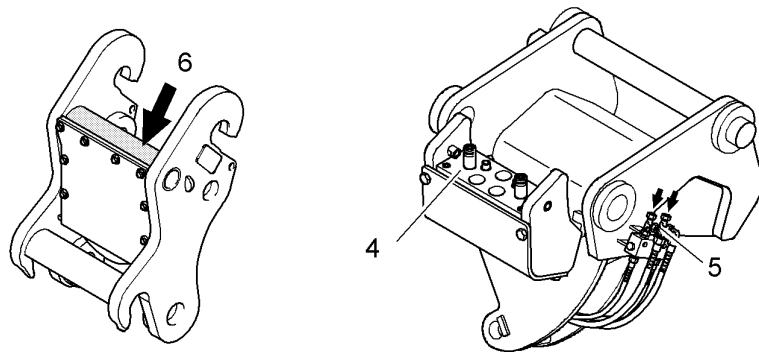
LIKUFIX work tool on quick-change adapter without LIKUFIX
